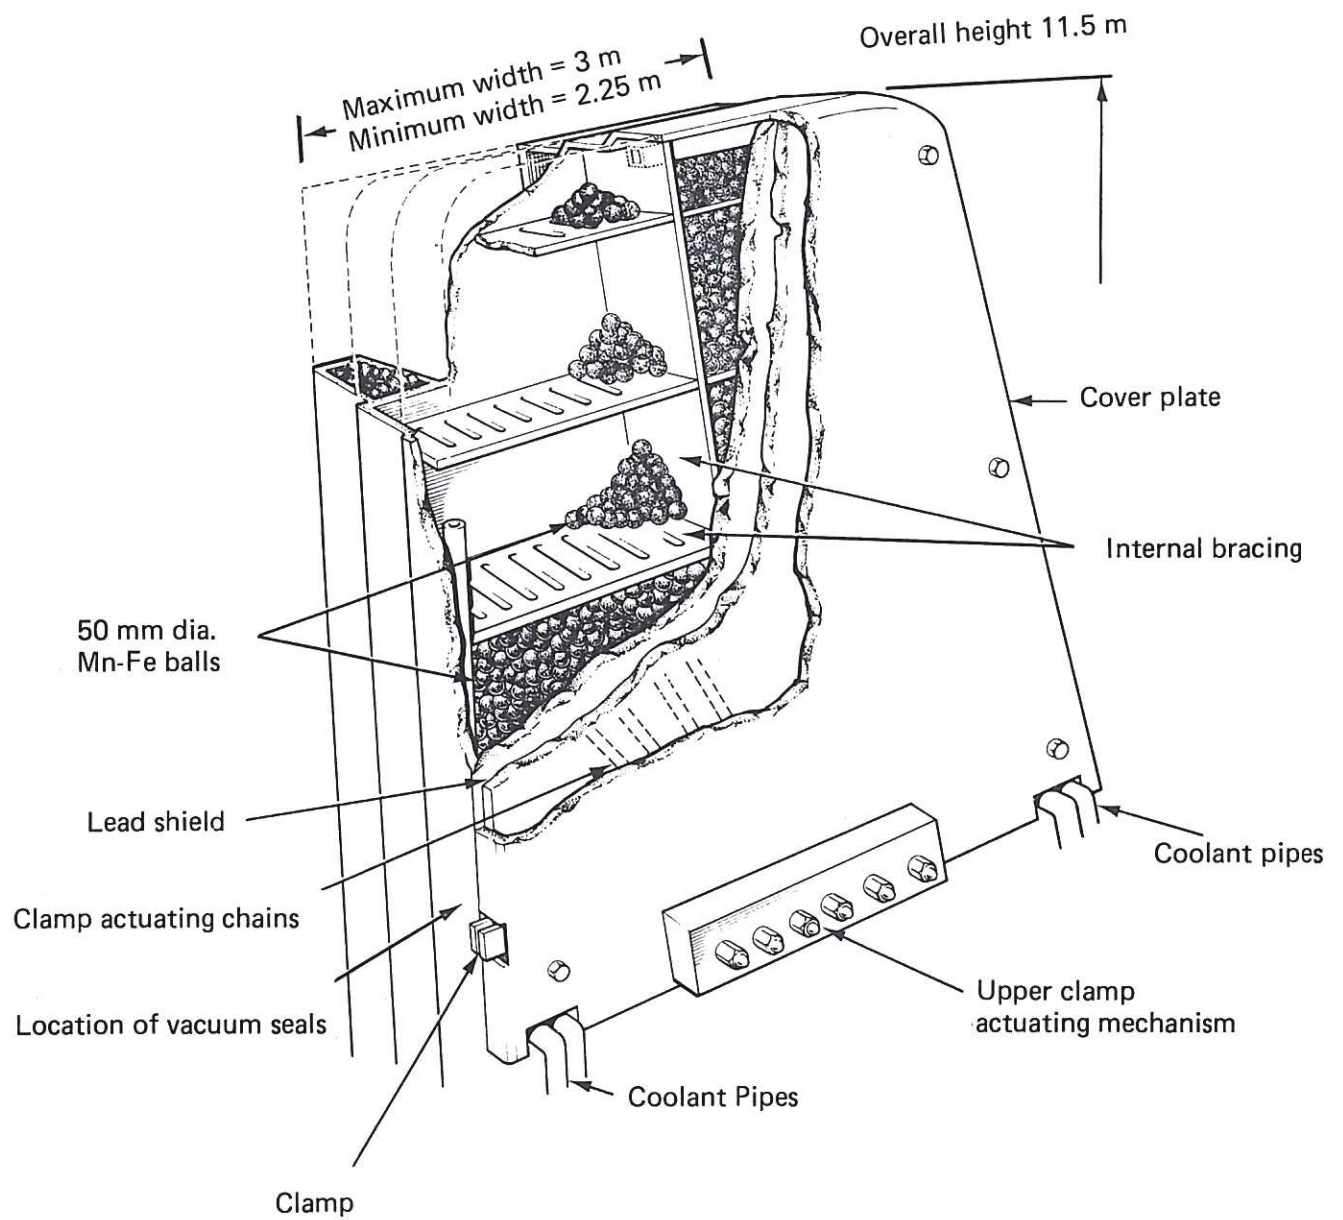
Construction of shield door showing internal structure and filling and overall dimensions.
